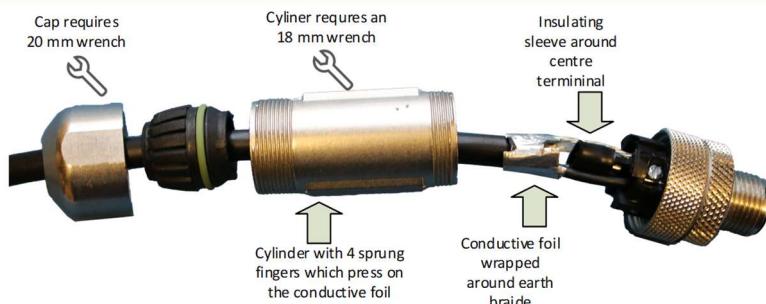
Exploded-view of an example of an SDI-12 sensor cable wired-up using the shielded connector.
